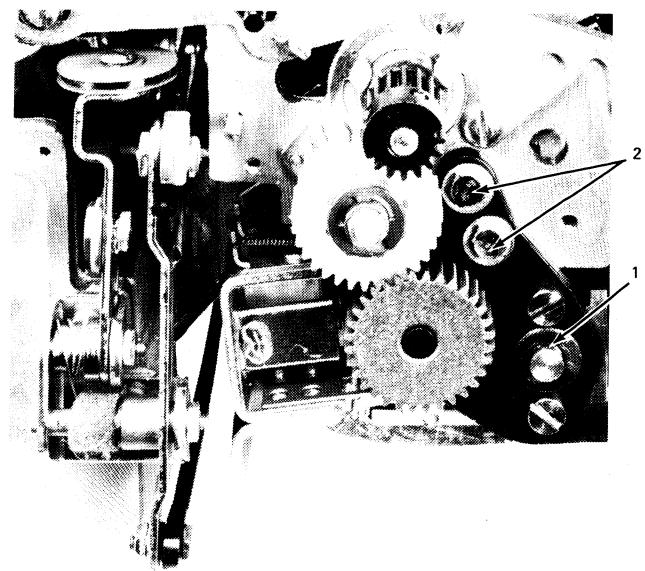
Print Feedback Removal (Left Side of Printer, Gear Guard Removed)
